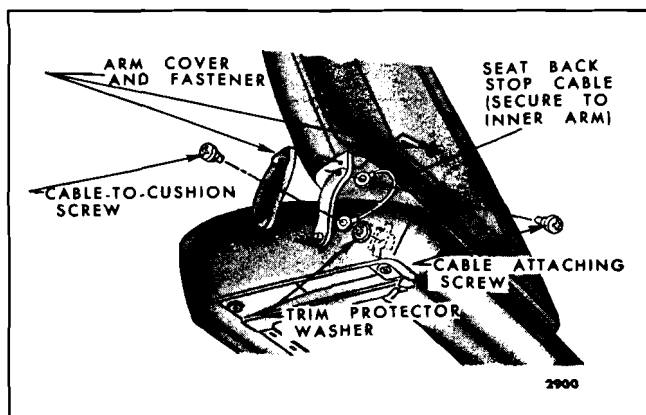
Bucket Seat Back Stop Cable—"F & Z" Styles
